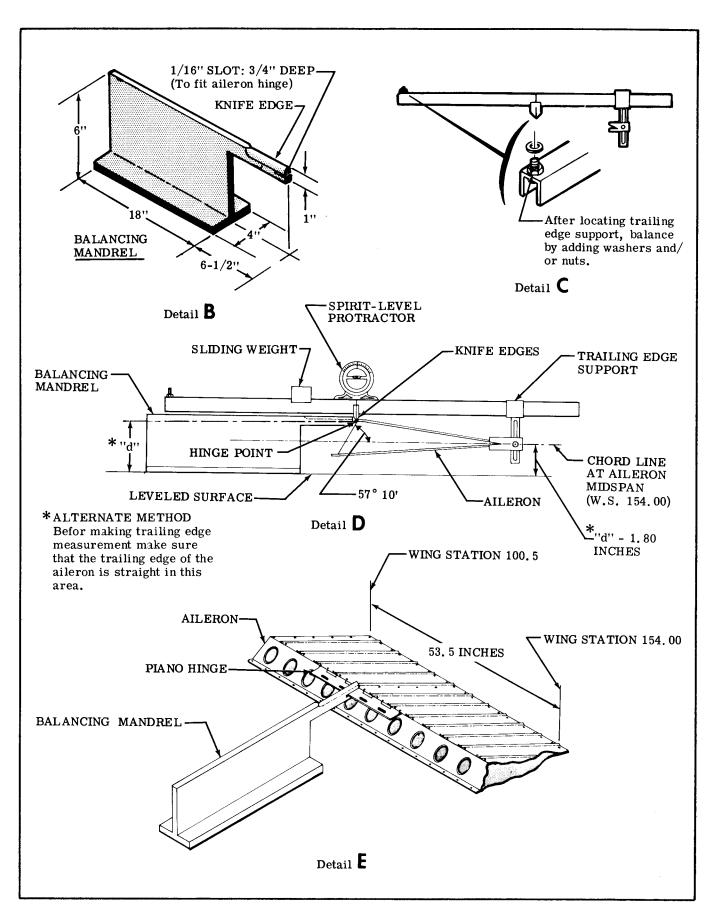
Control Surface Balancing (Sheet 3 of 5)
